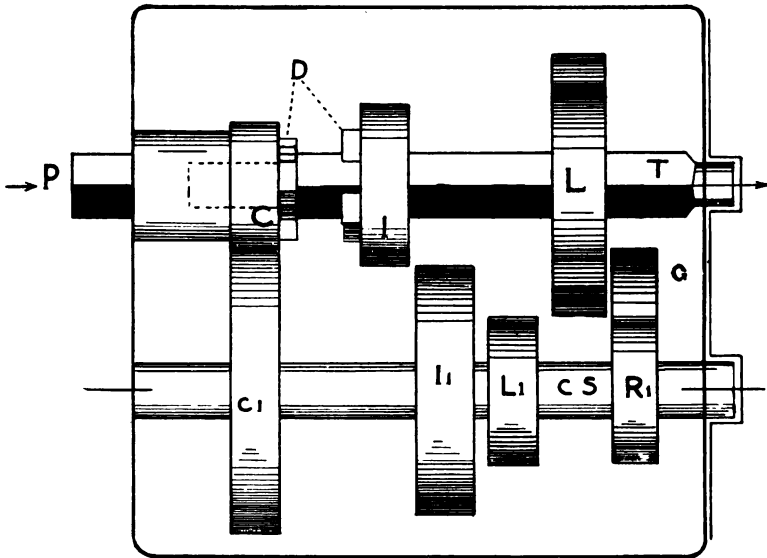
SHOWING ONE FORM OF THE THREE-SPEED SELECTIVE SLIDING GEAR.
